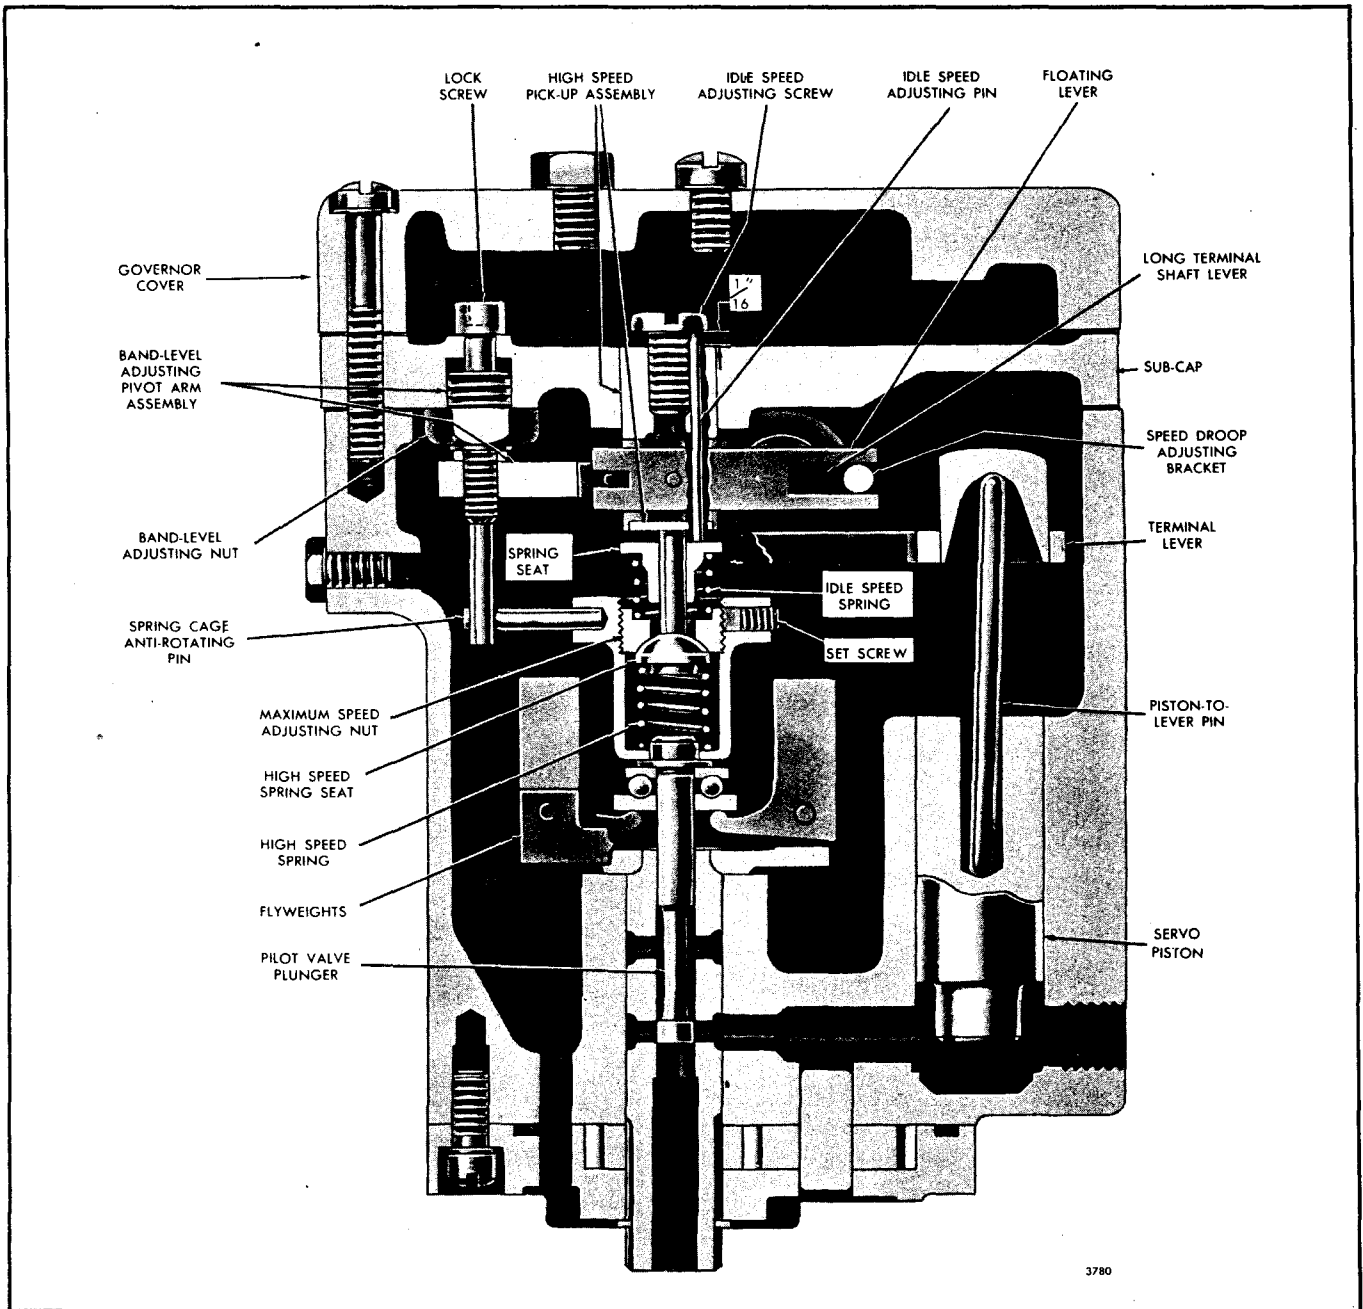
Cross-Section of Limiting Speed Hydraulic Governor for 16V Engine
